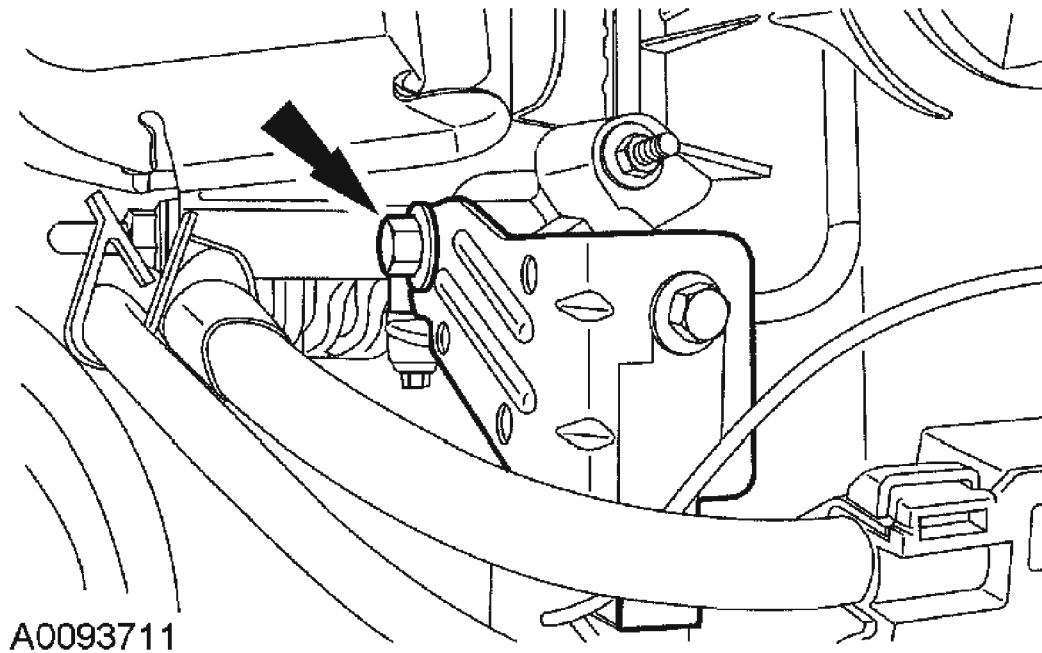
Removing Bolt, Radio Capacitor And Bracket
